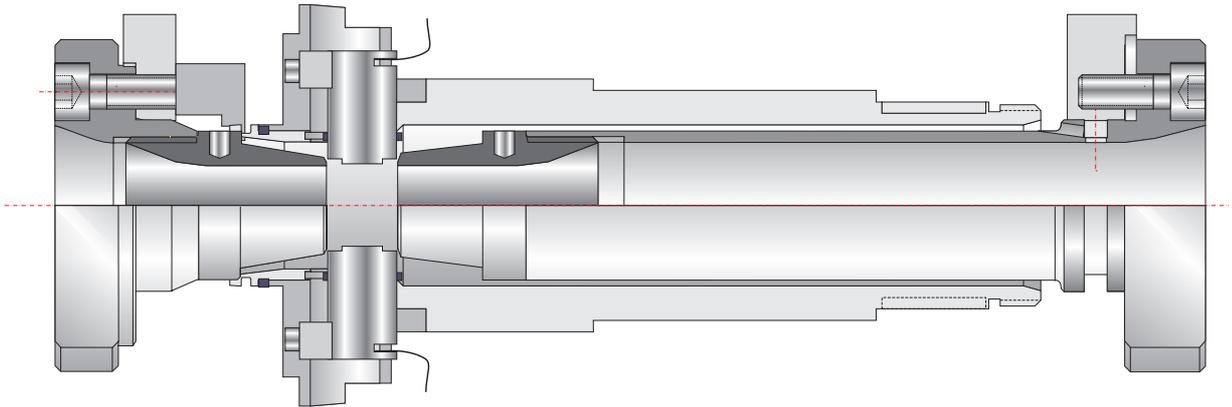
/1 Protective nozzle, schematic diagram, NM 2 bis 16 mm, nozzle holder with exchangeable nozzles
